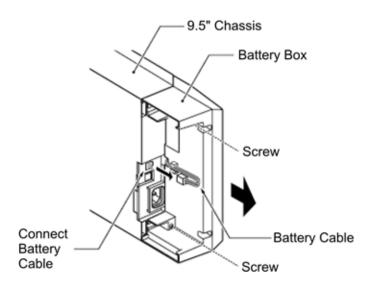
Removing the CHSGW SMALL BATT BOX
